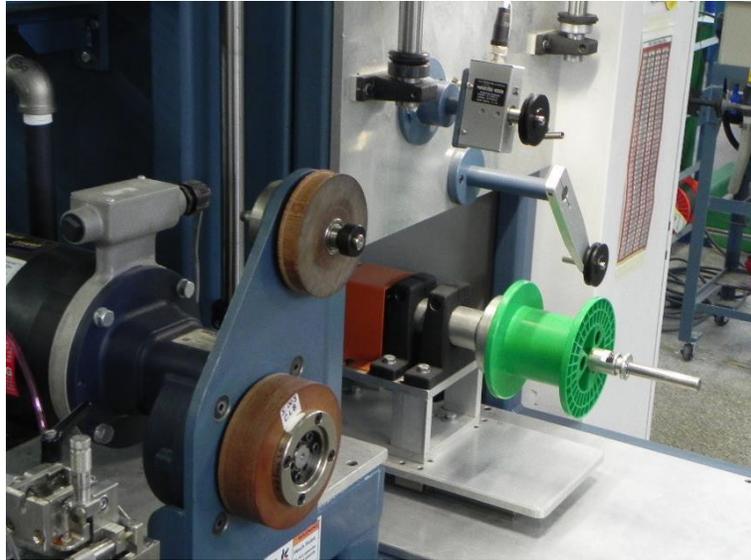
Schematic View of a Small Diameter Wire Drawing Equipment
